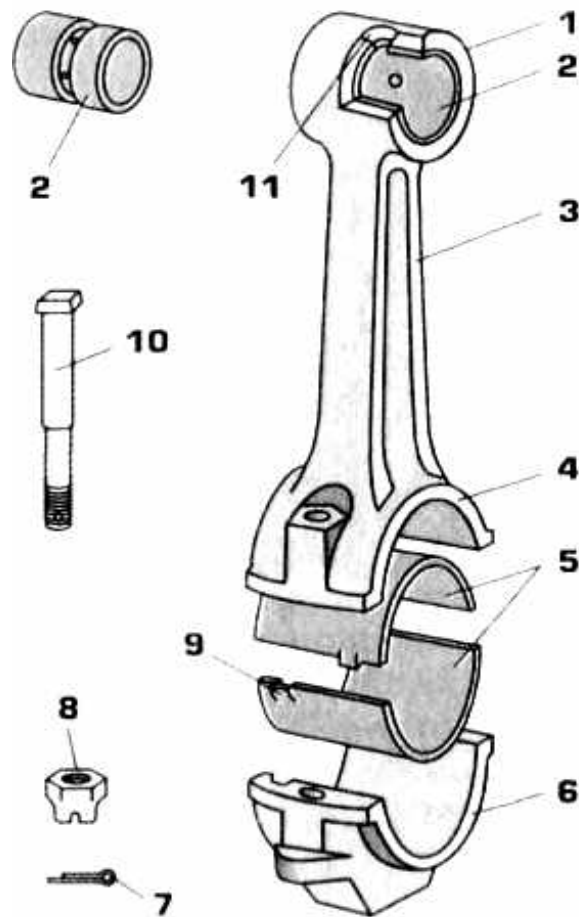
The generic connecting rod with a detachable big end: 1 – small end; 2 – small end bearing; 3 – web; 4 – big end upper half; 5 – big end bearing; 6 – big end lower half; 7 – split pin; 8 – castell nut; 9 – nib of the big end bearing; 10 – locking bolt
